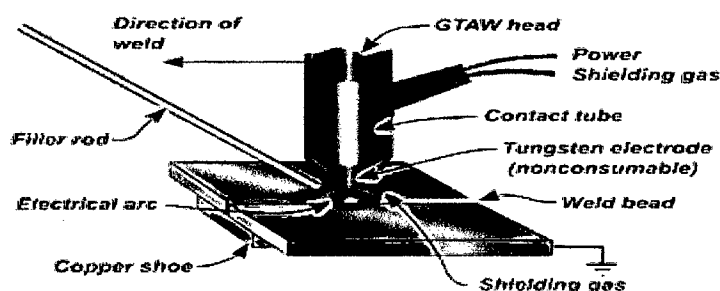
Gas Tungsten Arc Welding Operation
